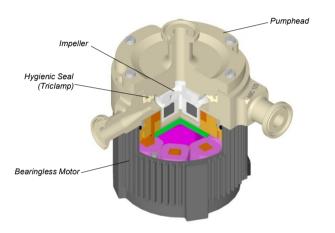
Cross-section of the bearingless pump motor and pumphead.
